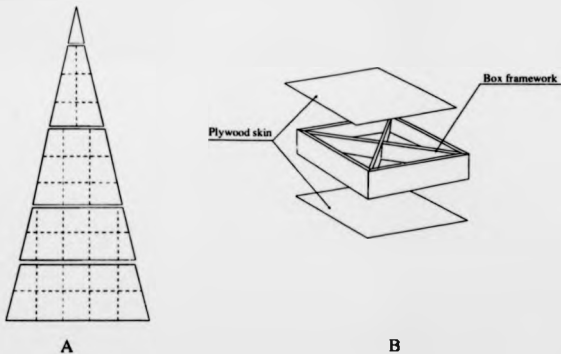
A) The five parts of the prototype delta wing. Broken lines show the timber boxes that make up each part. B) Layout of a typical box.
